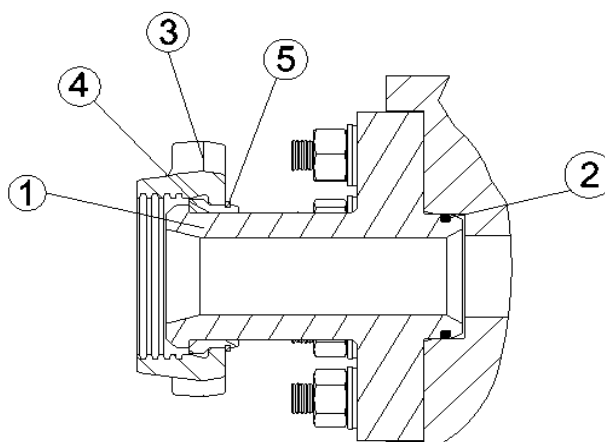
2" 1502 MALE UNIMOUNTING DISCHARGE FLANGE ASSEMBLY
